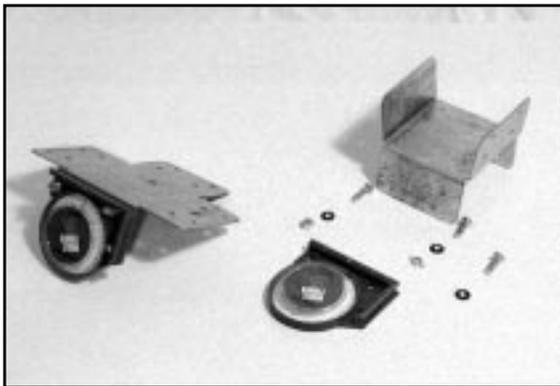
Blast Shield and Angle Indicator Support. Left of photograph shows the completed sub-assembly. Right side of picture shows original parts as purchased.
